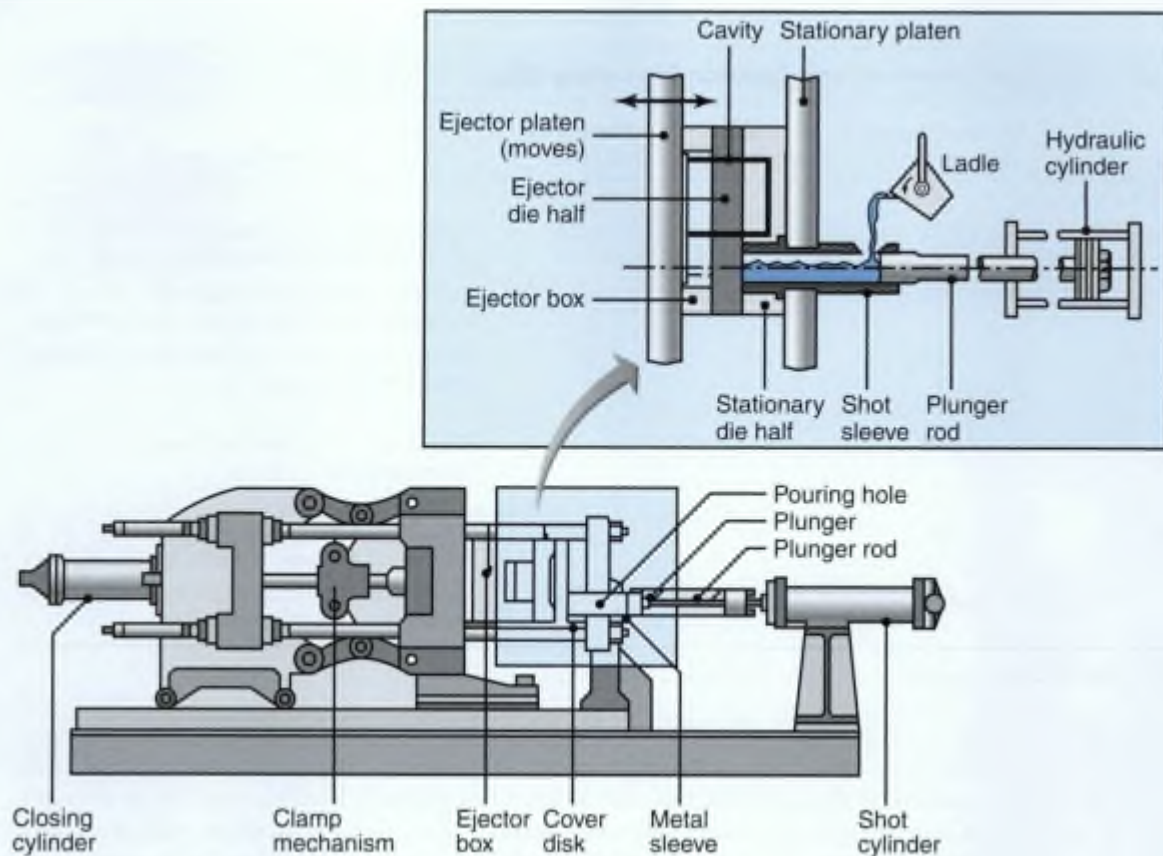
Schematic illustration of the cold-chamber die-casting process. These machines are large compared to the size of the casting, because high forces are required to keep the two halves of the dies closed under pressure during casting.
